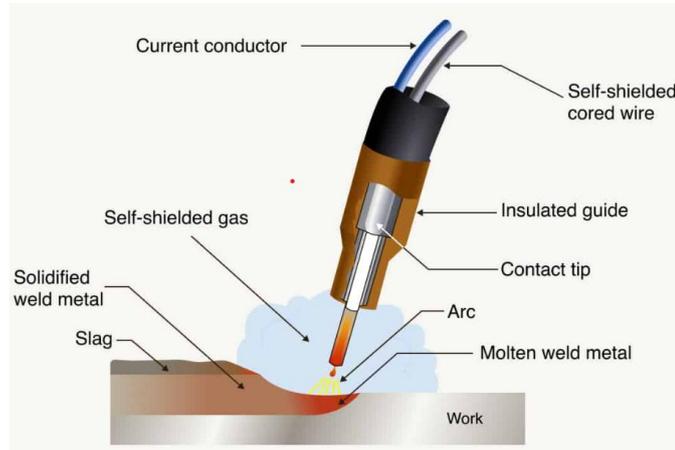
Flux Cored Arc Welding (FCAW)
